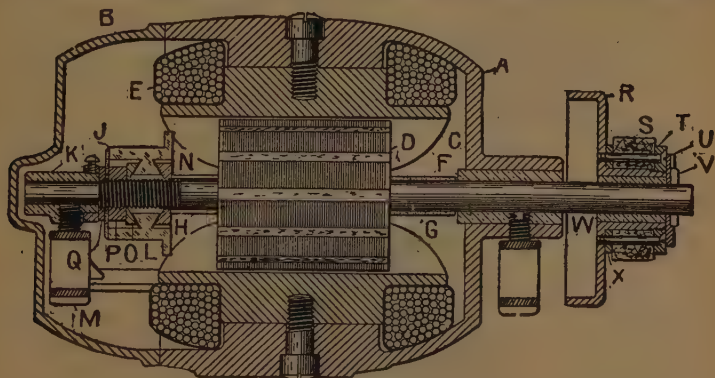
,951.—Sectional diagram of the Apple igniting dynamo. The parts shown are: A, cast iron body containing the moving parts; B, the hinged lid of the body; C, the one pole piece of one of the field magnets; F, brass bearing of the armature spindle; G and H, fibre tubes surrounding the spindle; K, brass spider supporting the spindle; L, commutator; M, wick feed oil cup; N, beveled nut supporting the commutator; O, P, Q, supports of the commutator; R, the driving disc; S, lever friction pinion. This machine can generate a direct current at 8 volts at a speed of between 1,000 and 1,200 revolutions per minute. It is provided with a simple centrifugal governor that automatically interrupts the driving connections when a certain speed has been exceeded.
